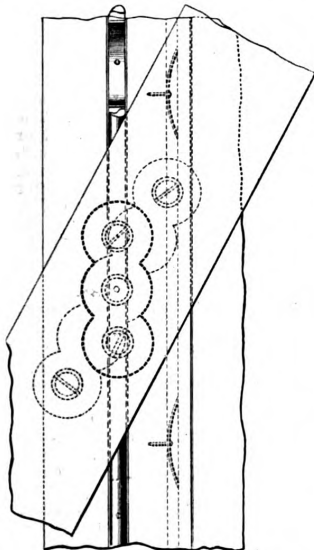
View Showing the Pivot Plates and the Sealing Rods.
